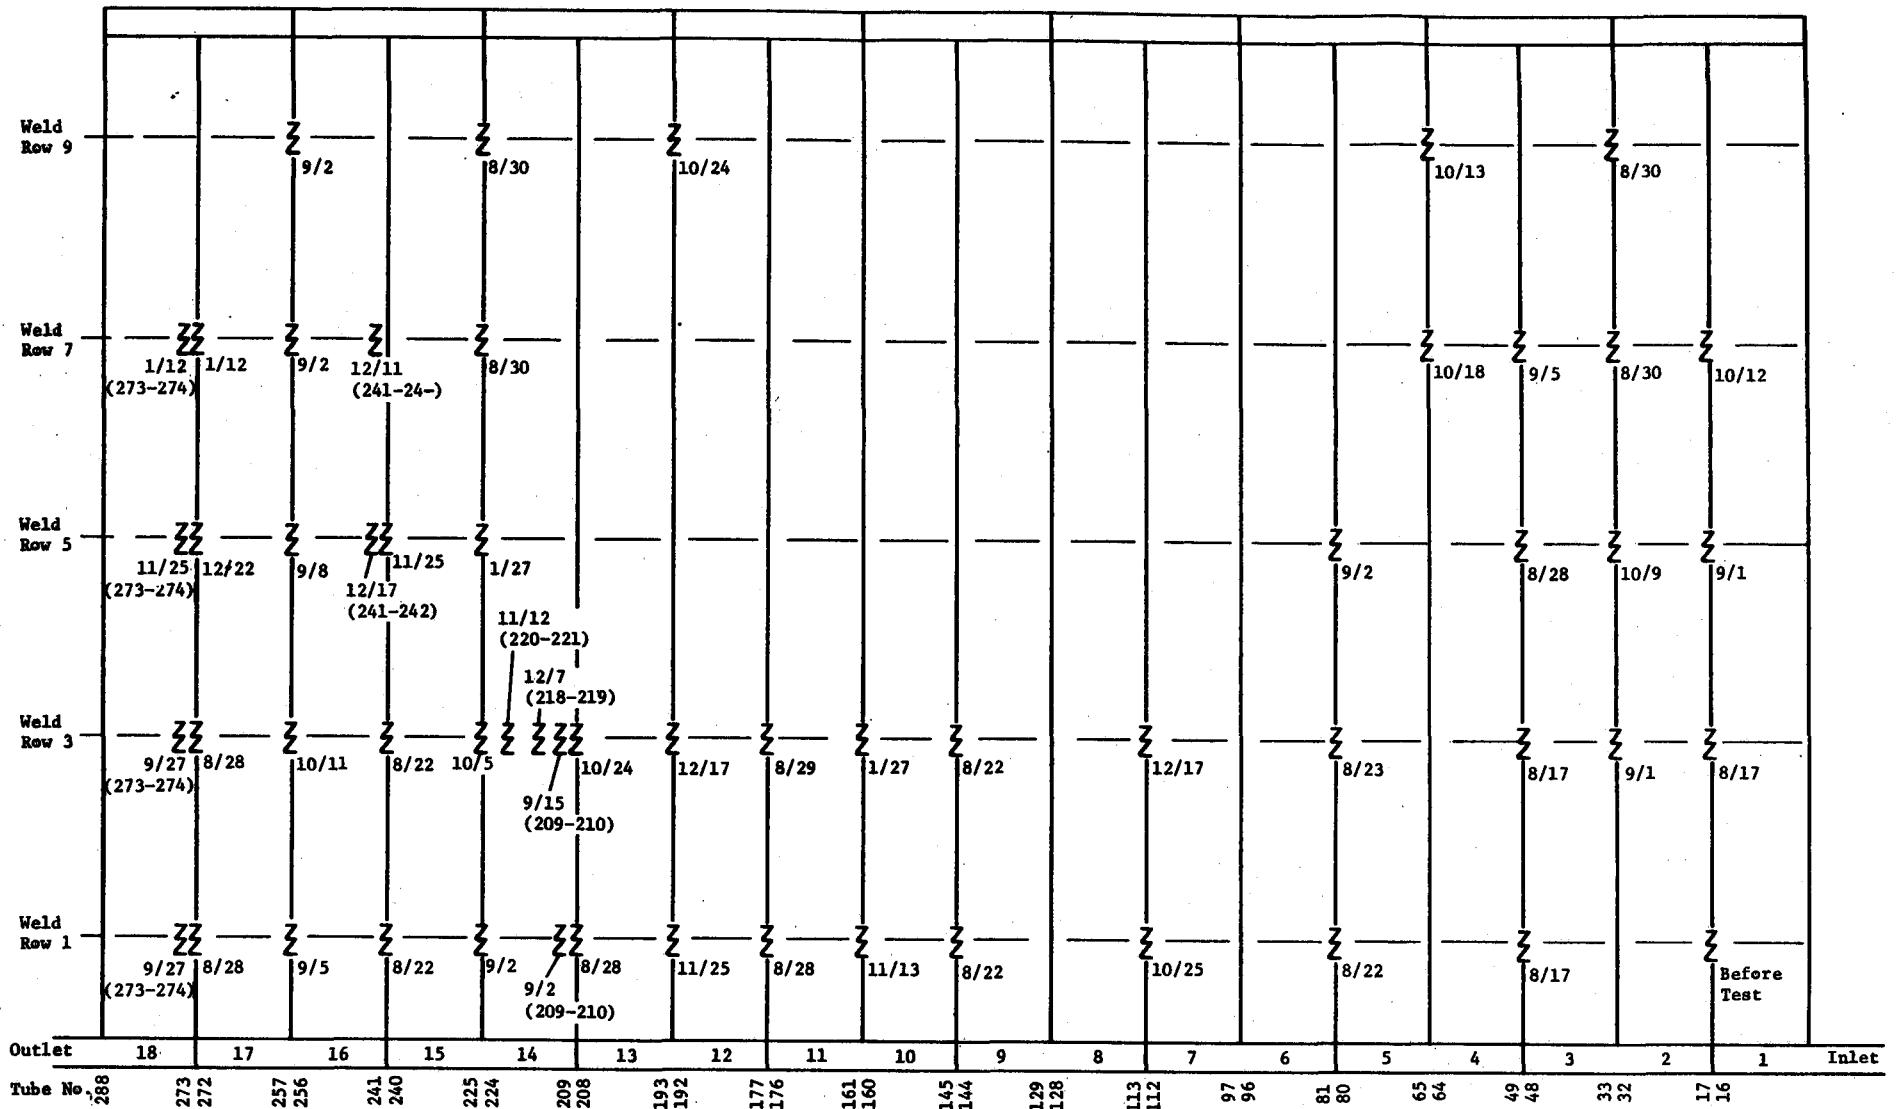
Weld Failure Locations with the Failure Dates
